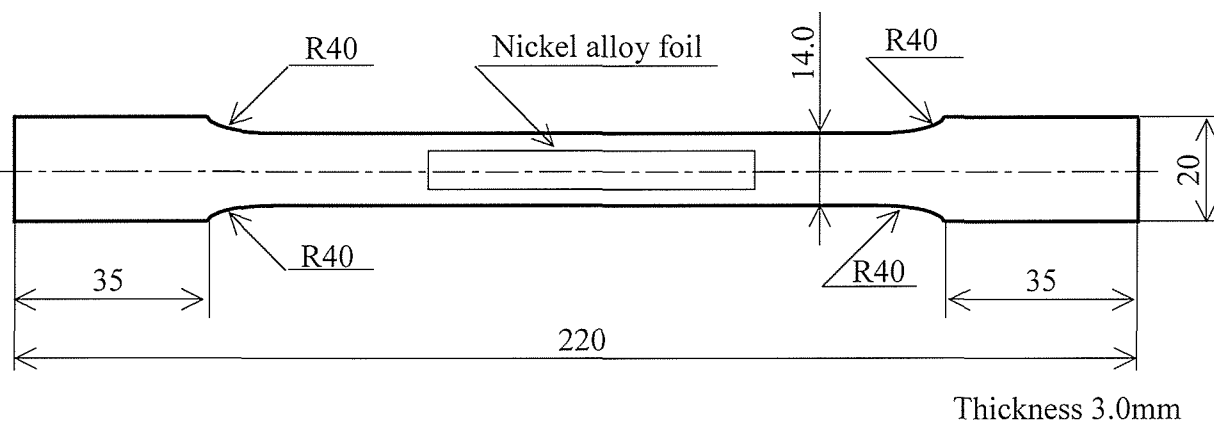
Geometry and dimensions of specimen for making precrack
